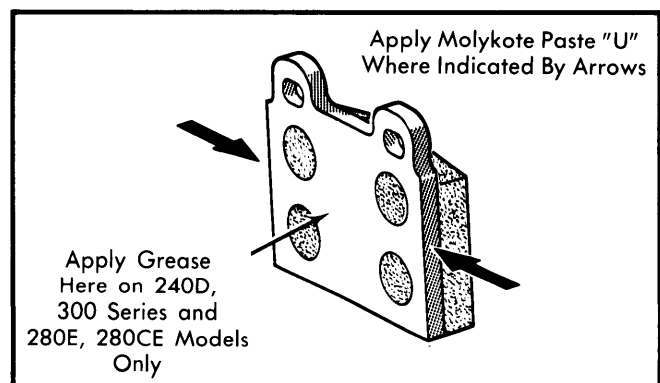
Typical Mercedes-Benz Disc Brake Pad Illustration Shows Molykote Application Points
